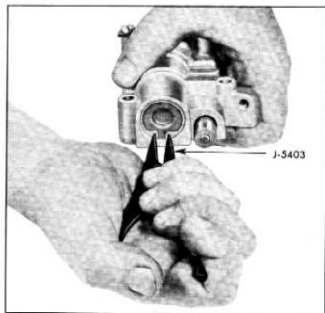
Removing Low and Drive Valve Body Snap Ring
